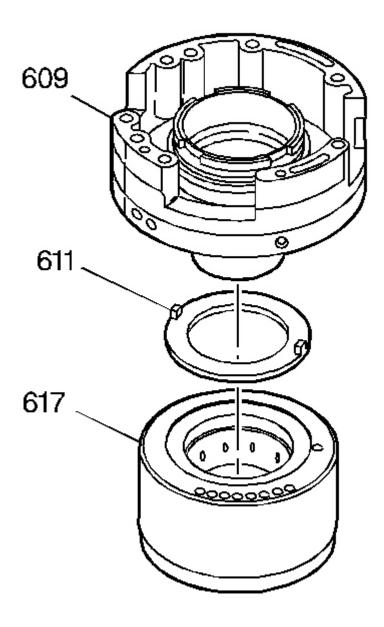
Identifying Second Clutch Housing Thrust Washer Courtesy of GENERAL MOTORS CORP.
